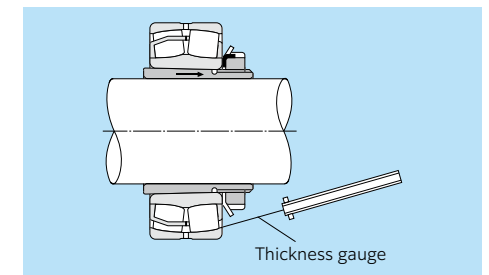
Internal clearance measurement method for spherical roller bearings
